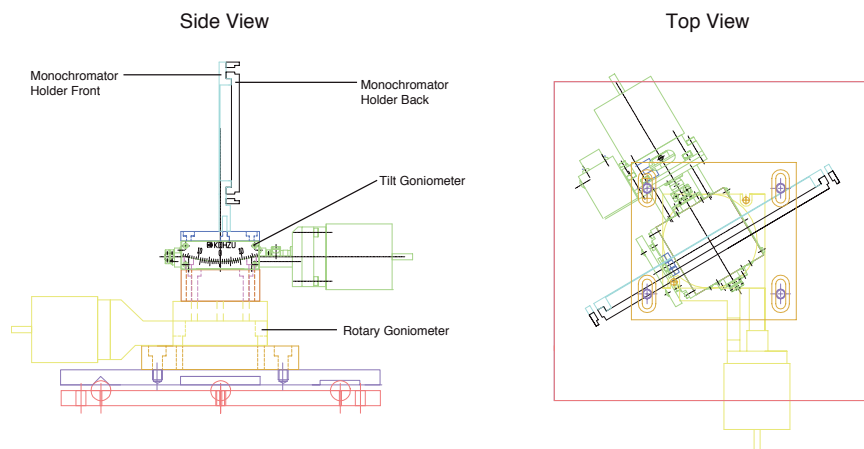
The monochromator assembly is shown. The monochromator is mounted on tilt and rotary goniometers.
